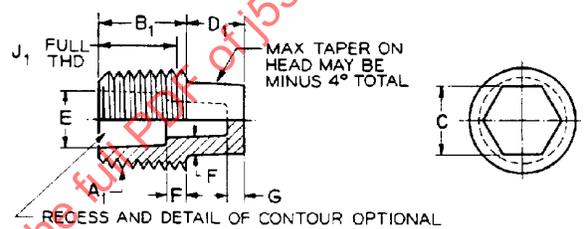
D—HEXAGON INSIDE HEAD FILLER AND DRAIN PLUGS^a (130109D)
